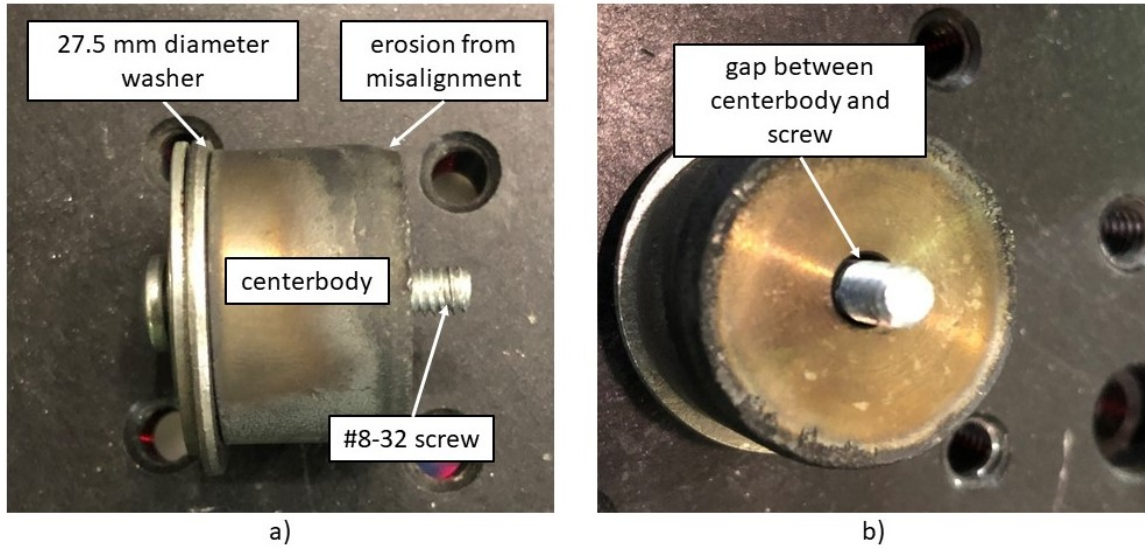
Configuration of the centerbody using a washer as a back plate a) side view b) mating surface to fuel manifold
